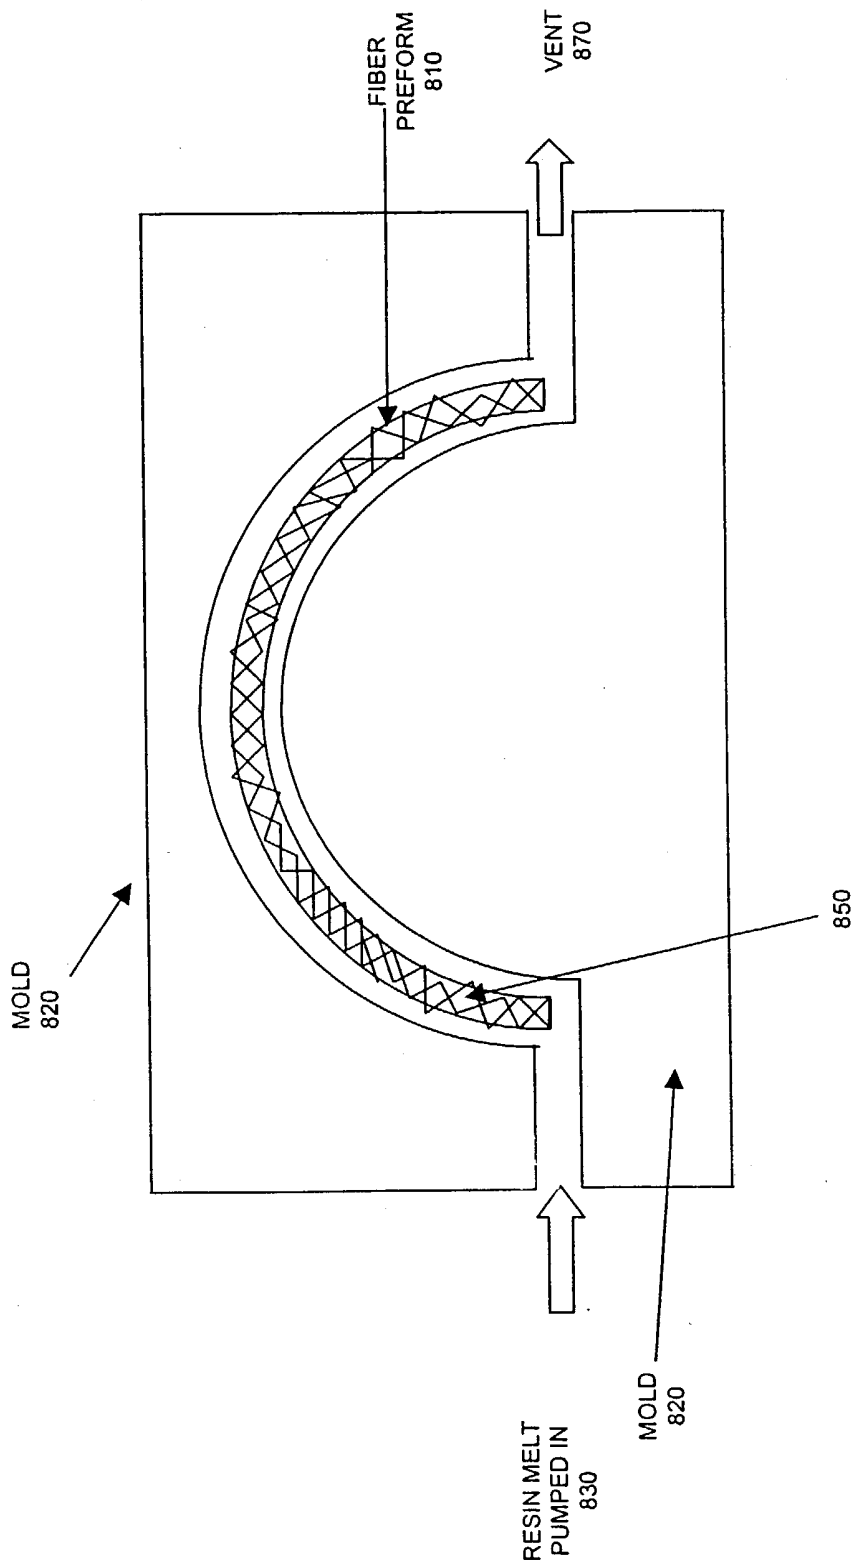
RESIN TRANSFER MOLDING PROCESS
